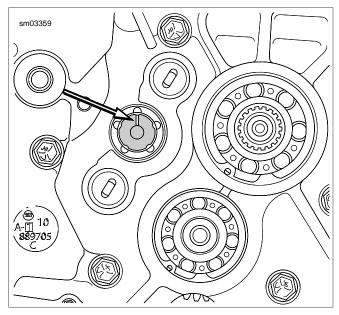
Scribed Line on Shifter Drum at 12 o'clock
